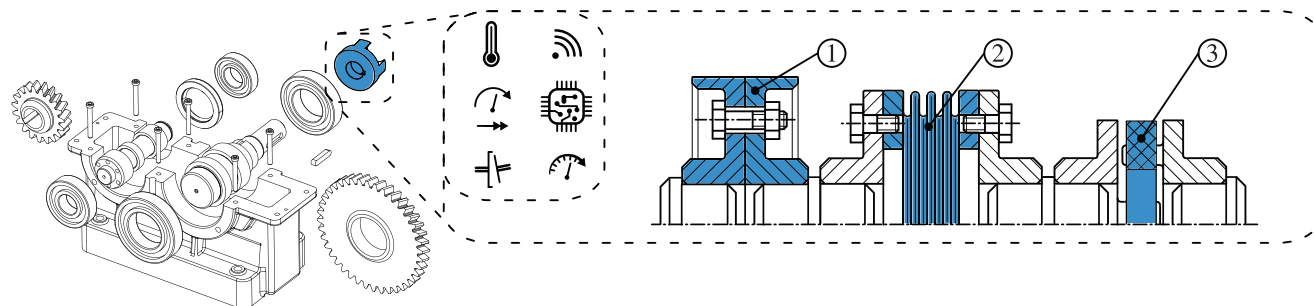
Sensor-integrating gear box, focusing on sensor-integrating couplings and their measuring task, exemplified by a sleeve coupling (1), a bellow coupling (2), and an elastic jaw coupling (3).
